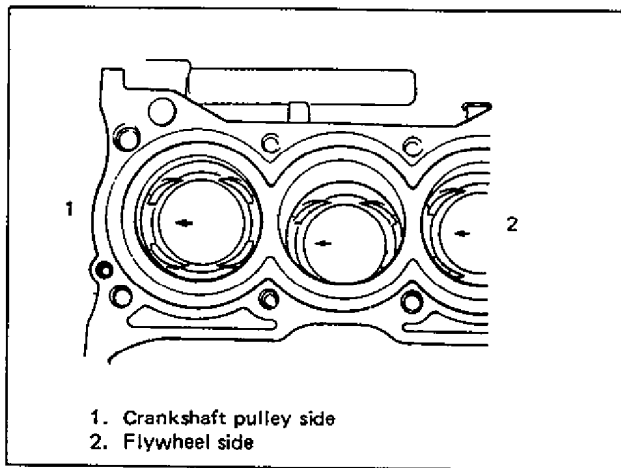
A-126 Direction of Arrow Mark on Piston Head
